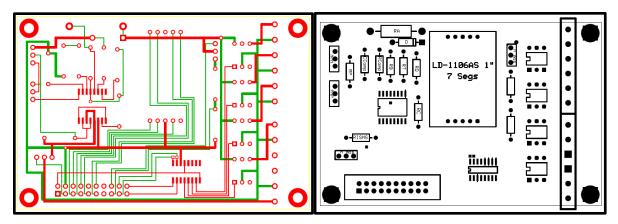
Second PCB Design Copper Layer (left) & Screen-print with Through-pads (right)
